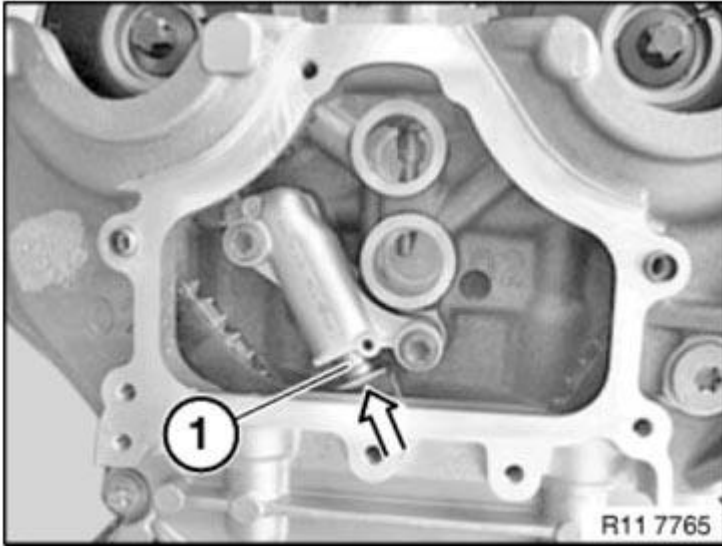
Identifying Piston Of Chain Tensioner Pressed In Against Oil Pressure In Housing
